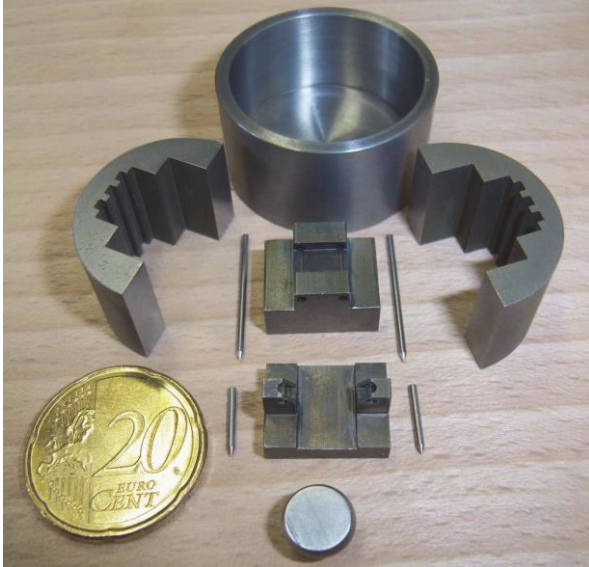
Testing equipment for 4-point-bending-tests in universal testing machine.
